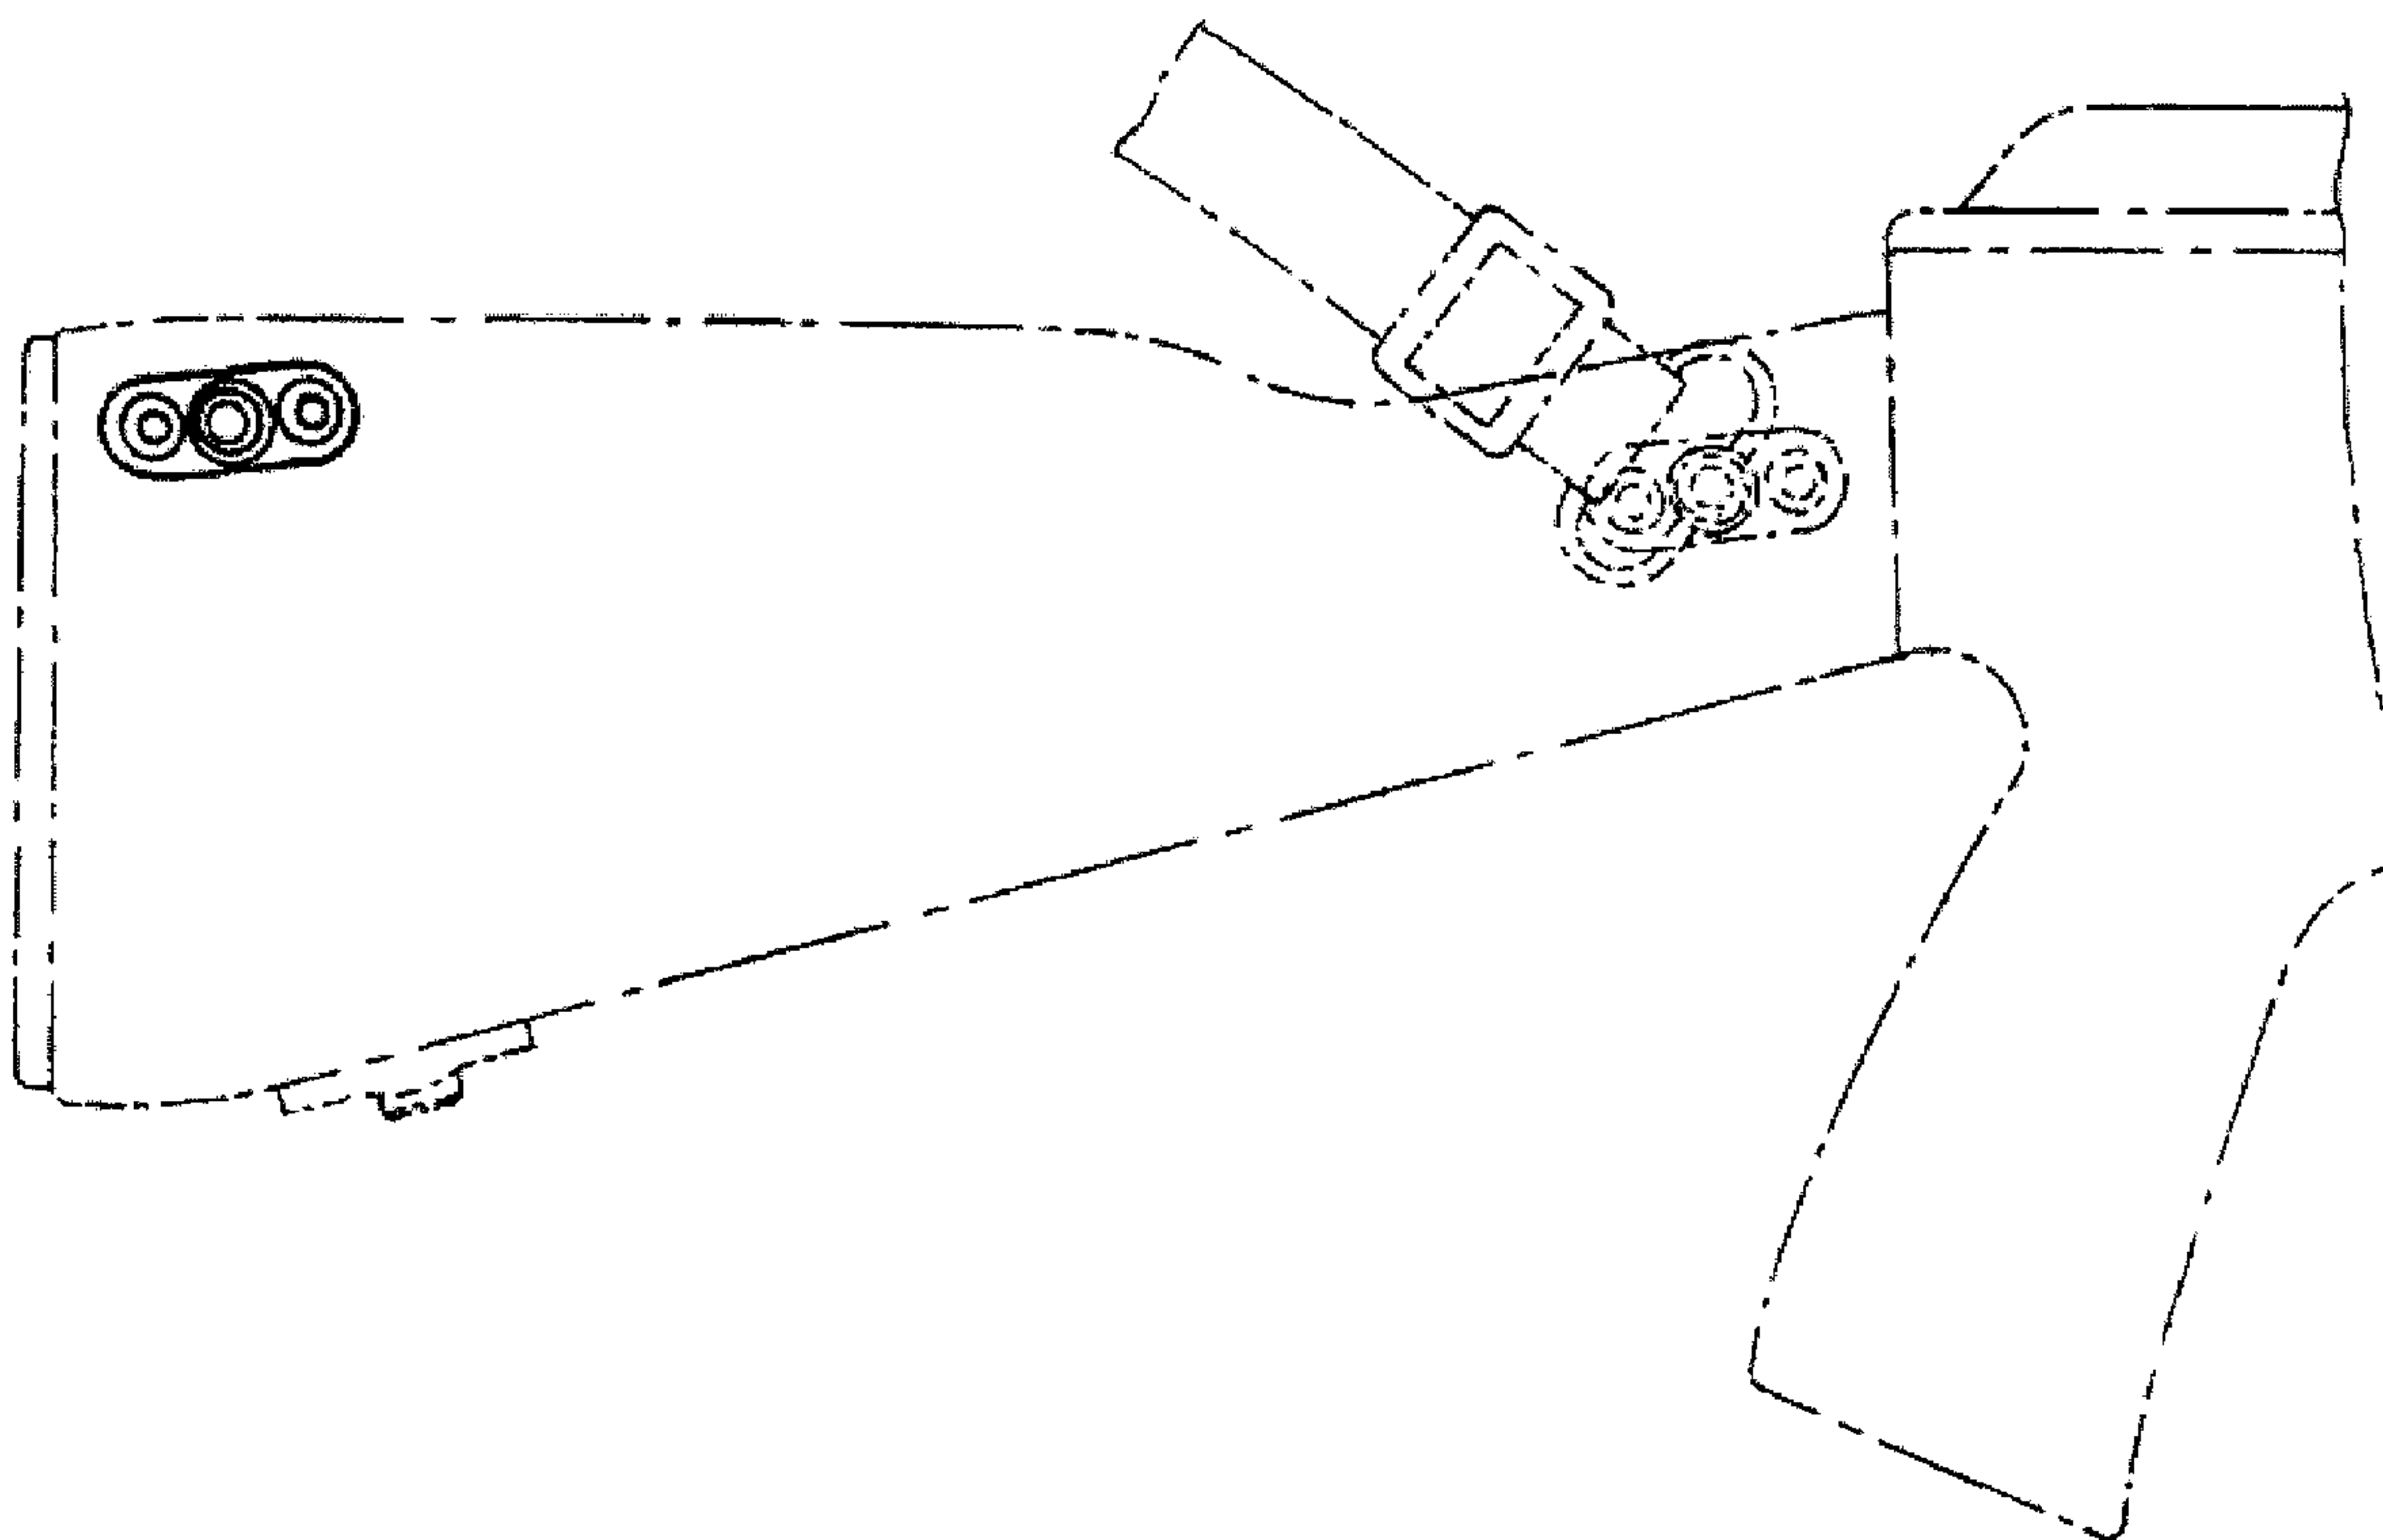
is an elevation view of a right side of the accessory mount shown in FIG. 2; and,
